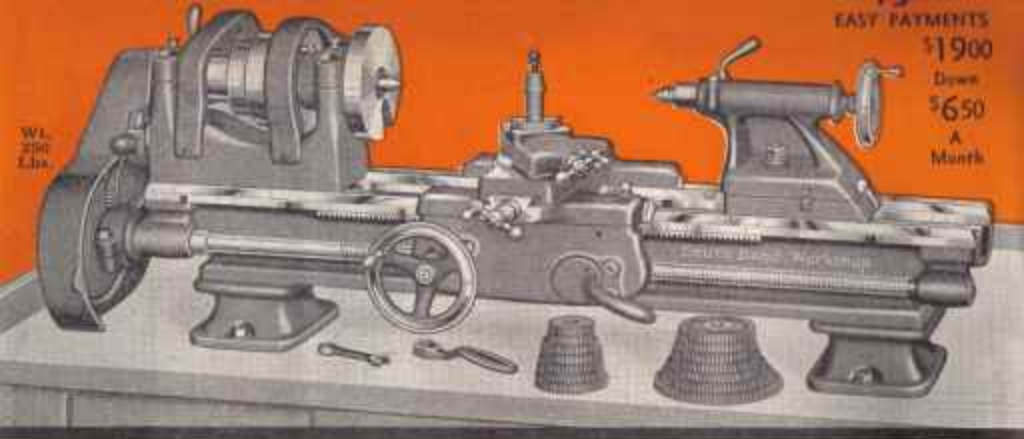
9-inch x 3-ft. "Workshop" Bench Lathe with Wrenches and Gears as Shown on Bench, But Less Drive Equipment and Bench.....\$78.00
